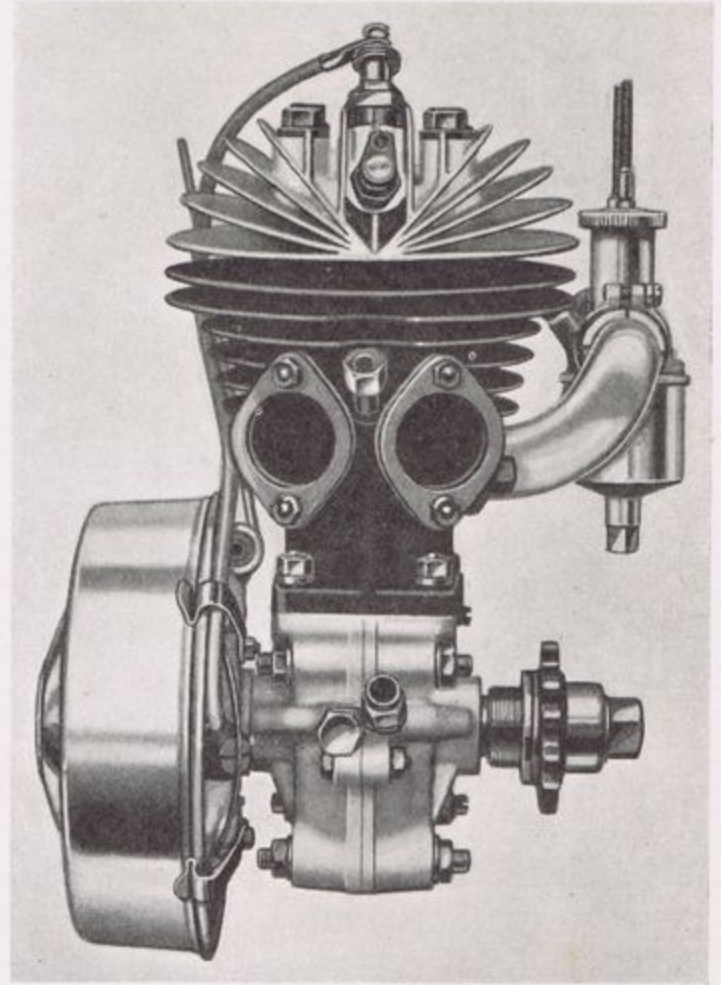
The Villiers 196 c.c. Super-sports-type Engine.
